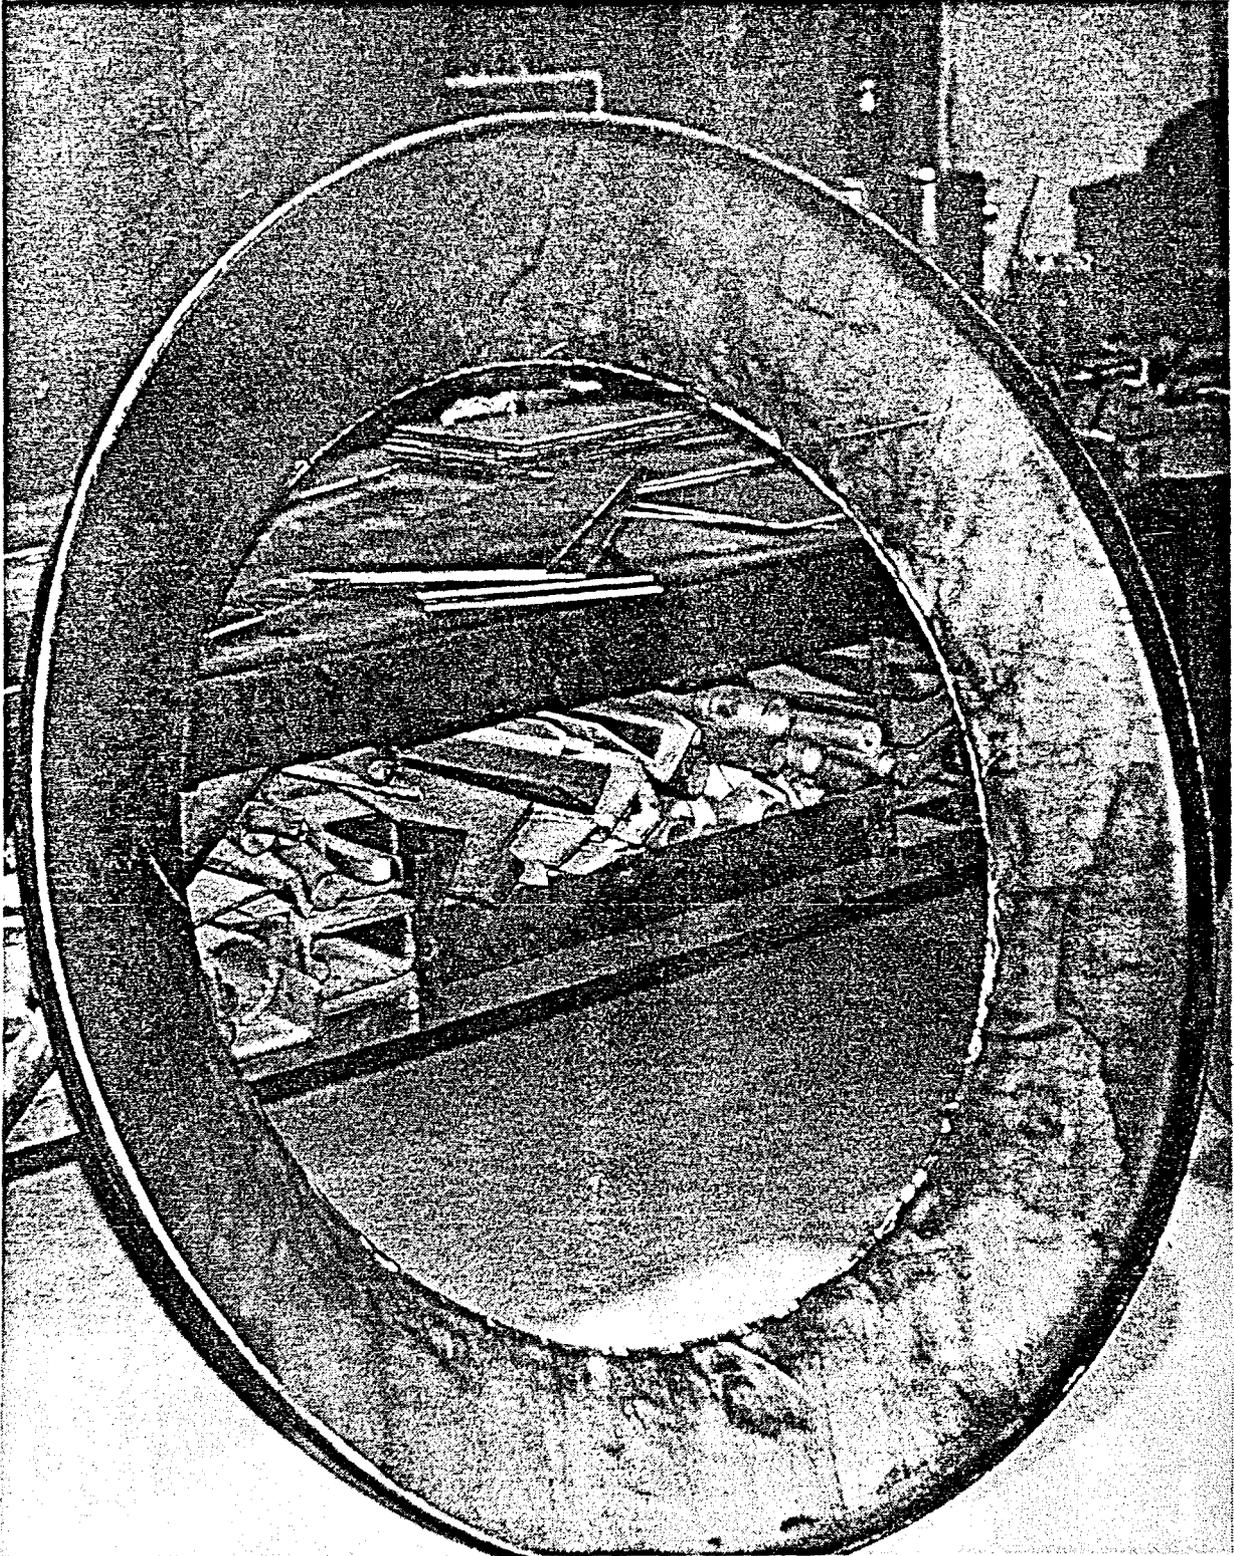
Saucer Skid Manufacture, Flat Bottom Skid—In Process.
